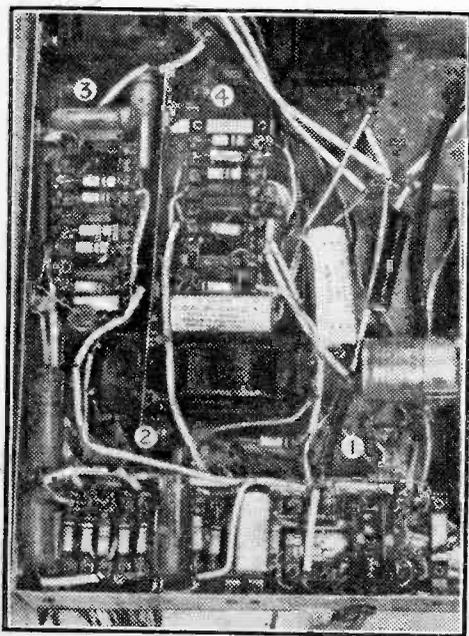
A corner of the chassis showing the tag boards—numbered 1 to 4. Wiring for these boards will be found on the facing page.
